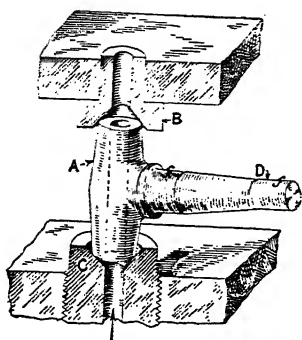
Incorrect Method of Locating a Forging for Drilling
